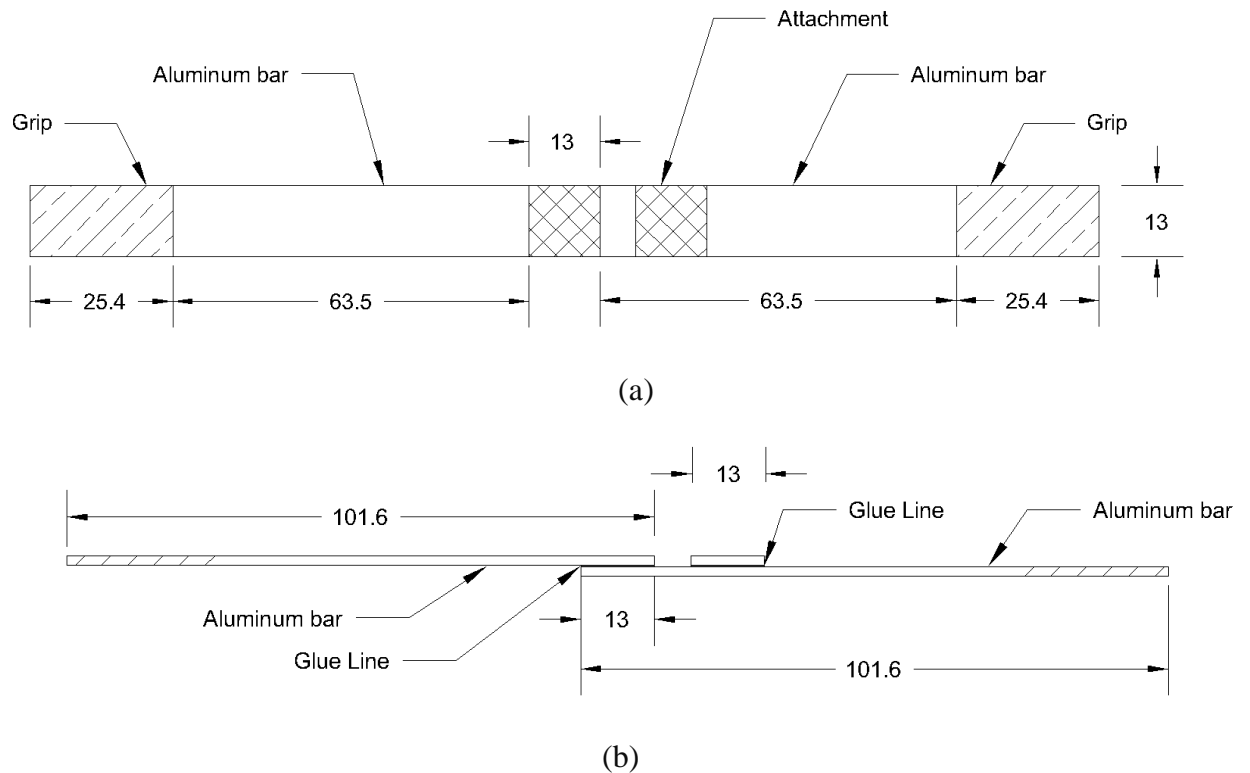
Geometry of adhesive shear specimens (a) top view and (b) side view (All dimensions are in mm).
